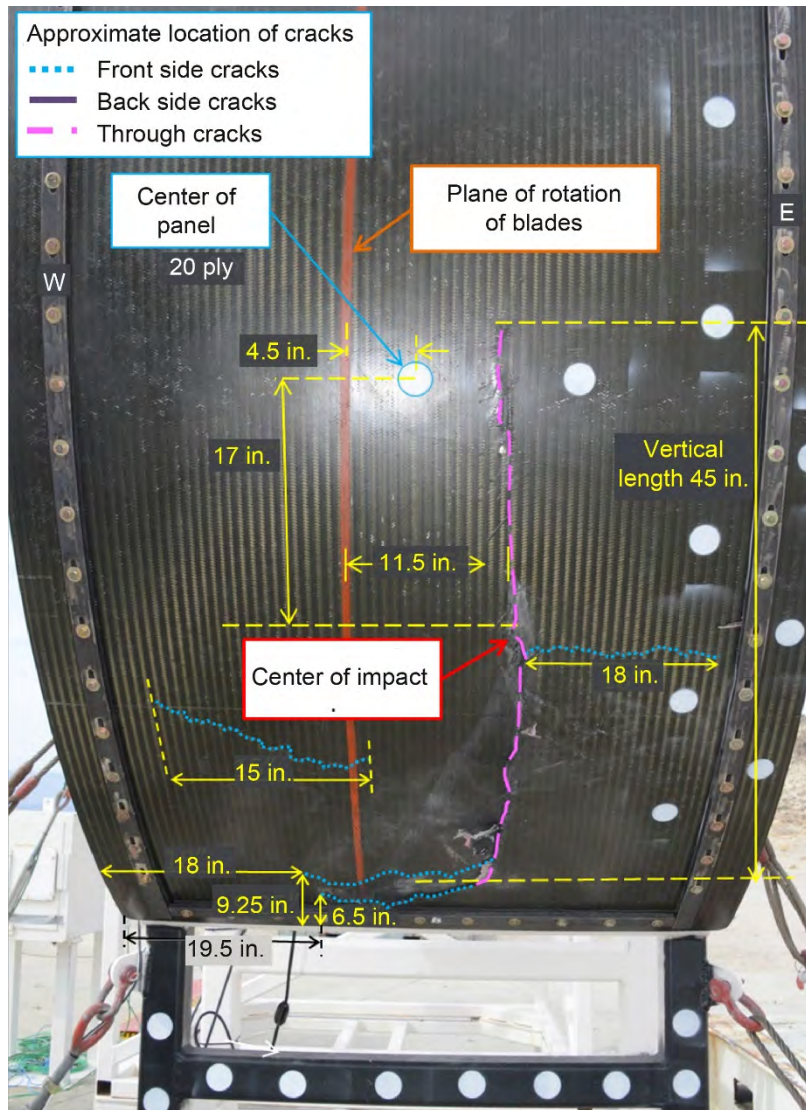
20-ply composite panel postimpact damage, front side, with measurements.
